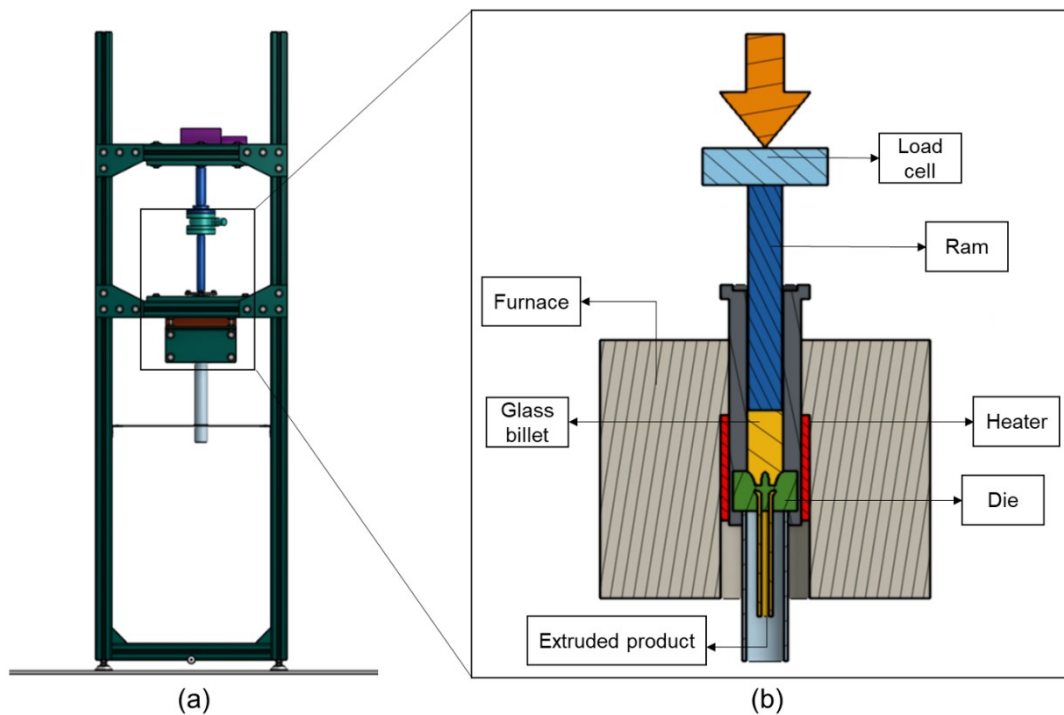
Detailed 3D drawing of the extruder set-up. (a) Lateral view of the whole system and (b) cross-section of the core of the extruder with highlighted the main components.
